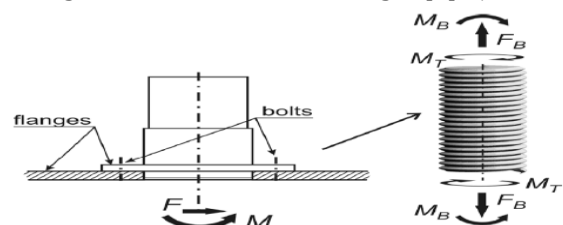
Example of Bolted Flange Joint loaded with pretension
